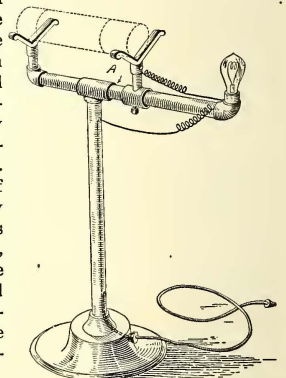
PORTABLE FUSE TESTER WITH PIPE CONSTRUCTION
